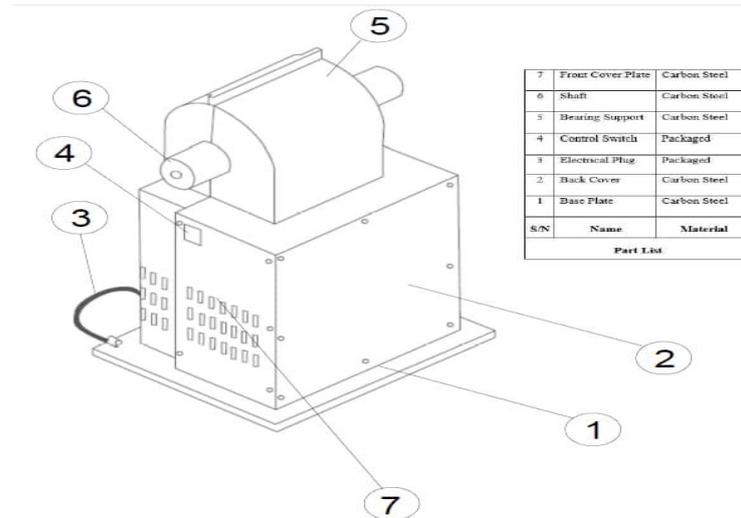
Isometric view of the semi- automatic shoe polishing machine.
